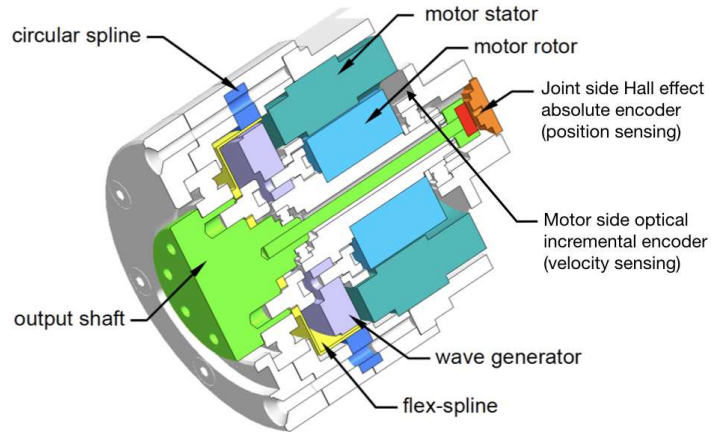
Motor group cross section, showing the brushless motor, the harmonic drive and the angle position encoders. Source: [Parmiggiani et al., 2012, Fig.3]
